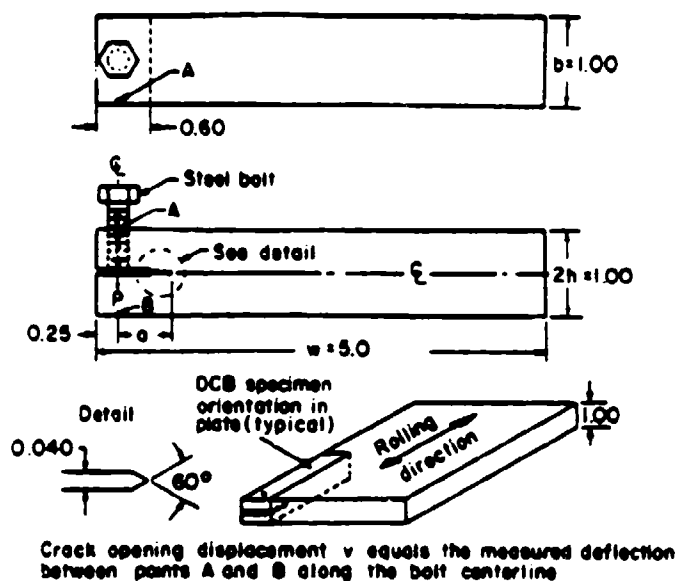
Bolt-Loaded Double Cantilever Beam (BDCB) Specimen.
